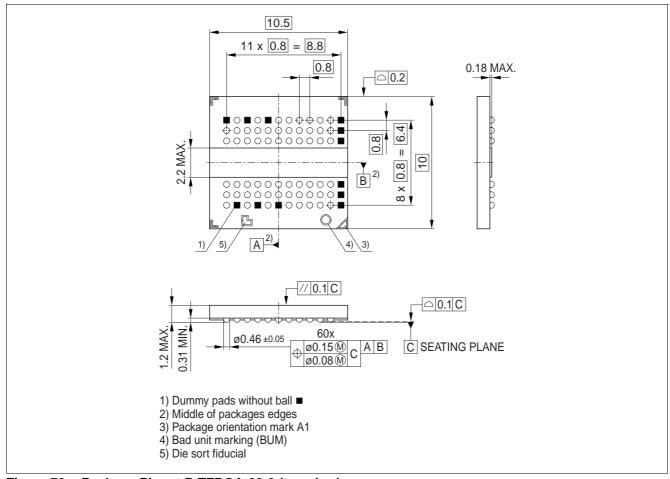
Package Pinout P-TFBGA-60-6 (top view)
